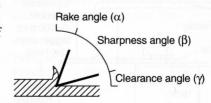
Geometry of the tool edge according to Koch (1964), pp. 111–112. (The sharpness angle is also referred to as wedge angle or edge angle in the literature.)
